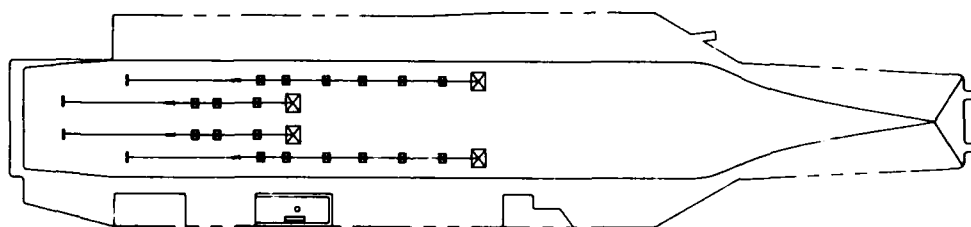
Line Shaft Bearing Layout Nimitz Class Aircraft Carrier CVN 68 Shown
